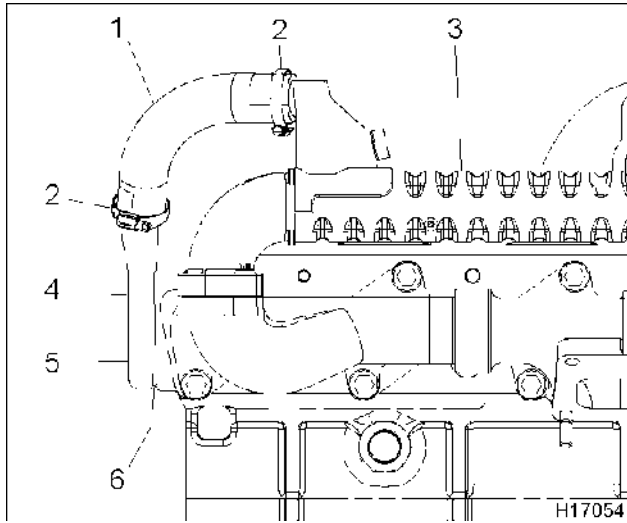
EGR coolant return tube adapter and EGR coolant hose
